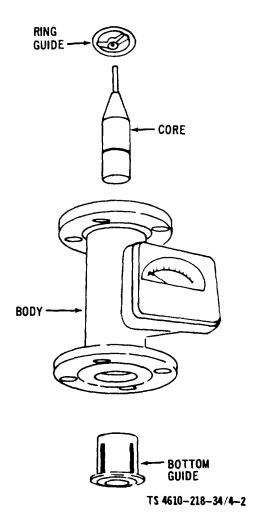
Raw Water Flow Indicator, Disassembly and Reassembly
